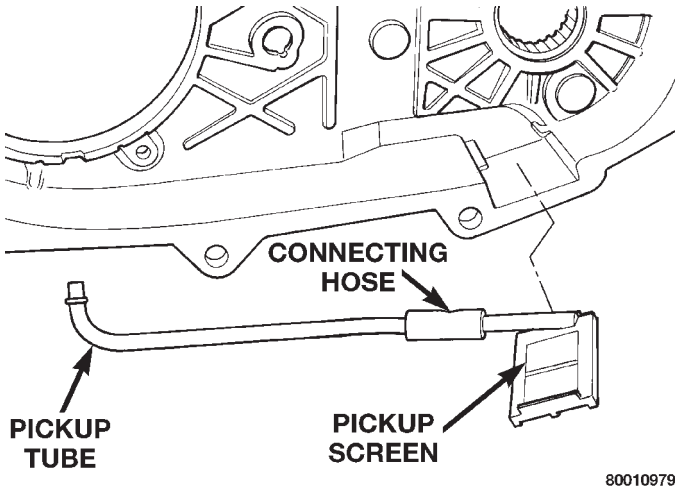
Oil Pickup Screen, Hose And Tube Removal
